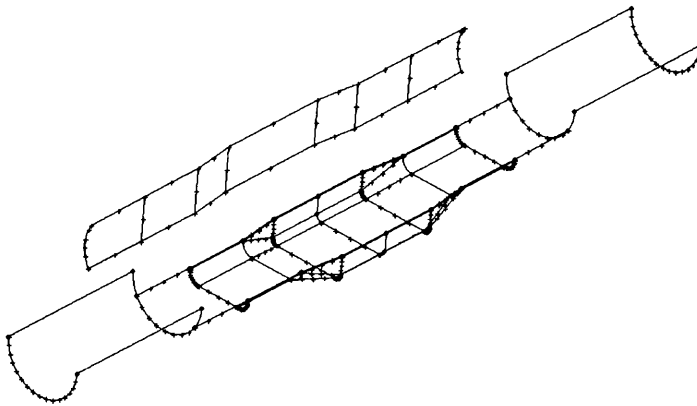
Hydroform die tool ‘working’ surfaces for side and lower tool sets.
